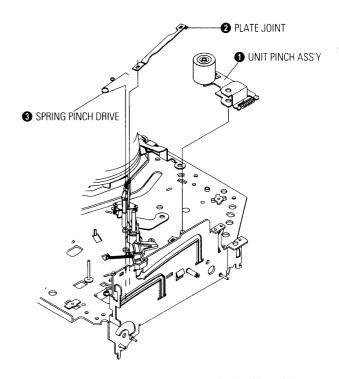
Unit Pinch Ass'y, Plate Joint, Spring Pinch Drive Removal
